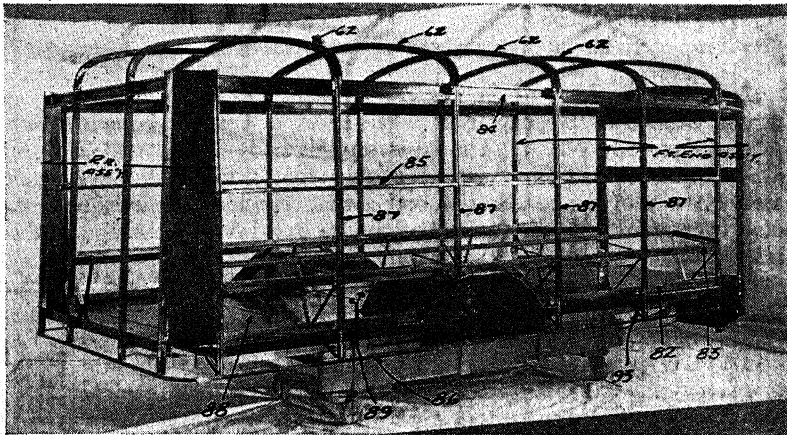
Arc welded body ready for outer shell panels.
